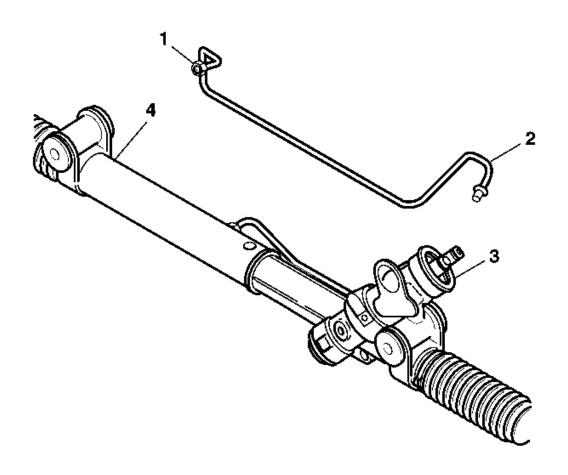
Installing Larger Cylinder Line Into Valve Housing Courtesy of GENERAL MOTORS CORP.
